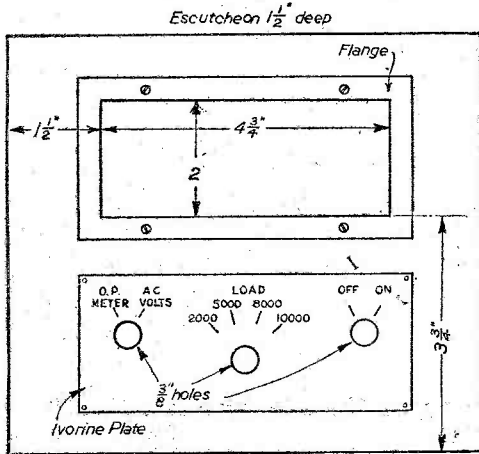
Showing size of escutcheon and layout of cabinet front.
